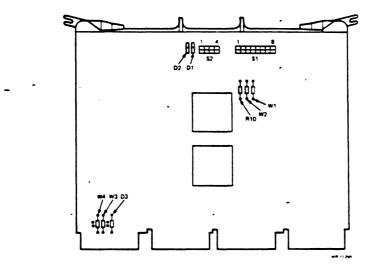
MSV11-JB/JC LED/SWITCH PACK/JUMPER LAYOUT
